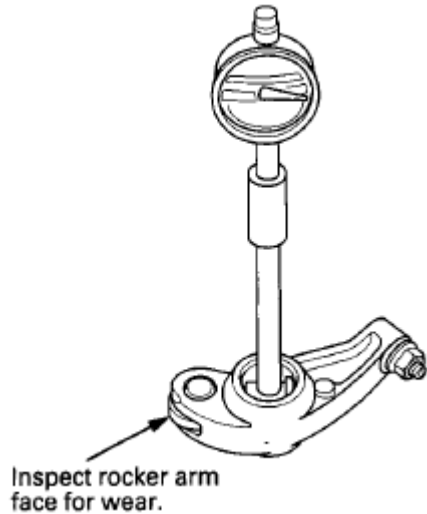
Measuring Inside Diameter Of Rocker Arm And Check For Out-Of-Round Condition
